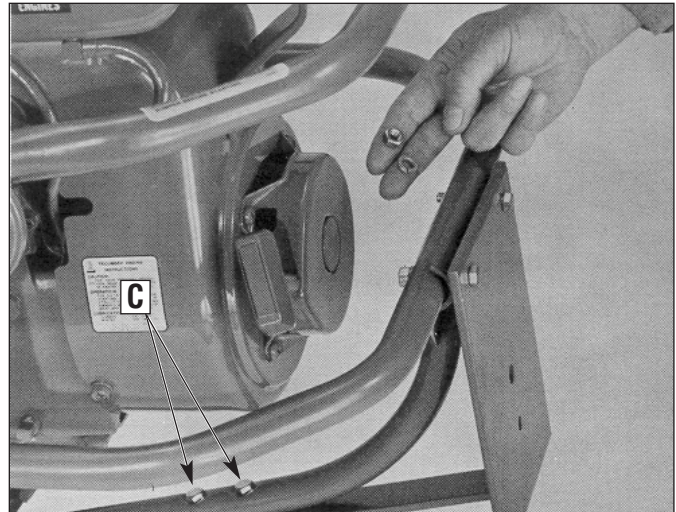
ATTACHING THE BLADE MOUNTING BRACKET
